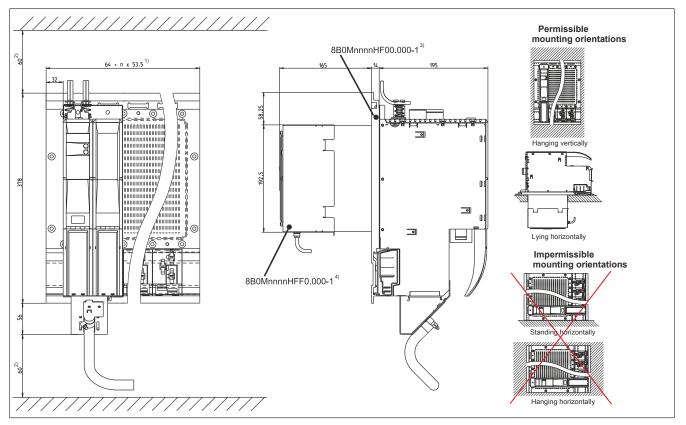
Feed-through mounting - Dimension diagram and installation dimensions
